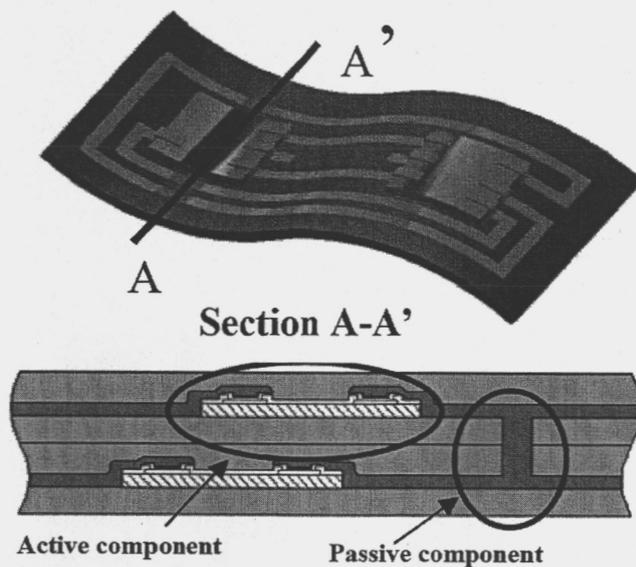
Illustration of Samsung/Yonsei university 3D Packaging Technology.
